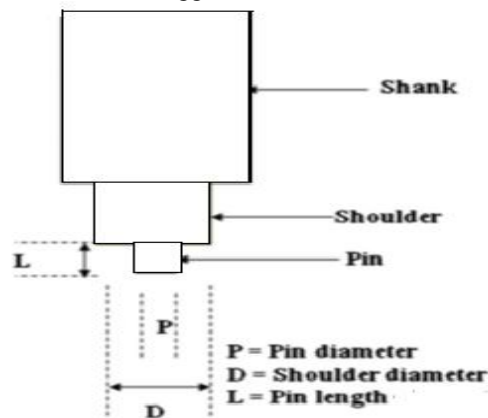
A Schematic View of FSW Tool (S. Raja Kumar) [2]
